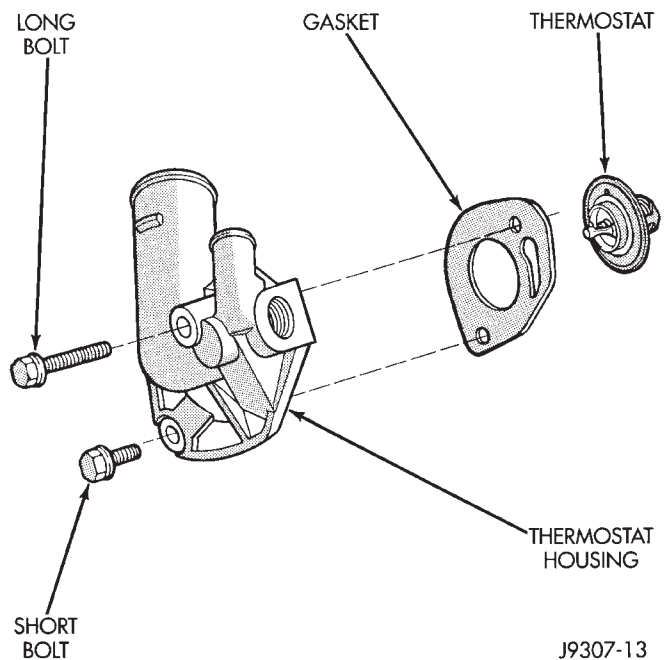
Thermostat Removal/Installation—4.0L Engine
